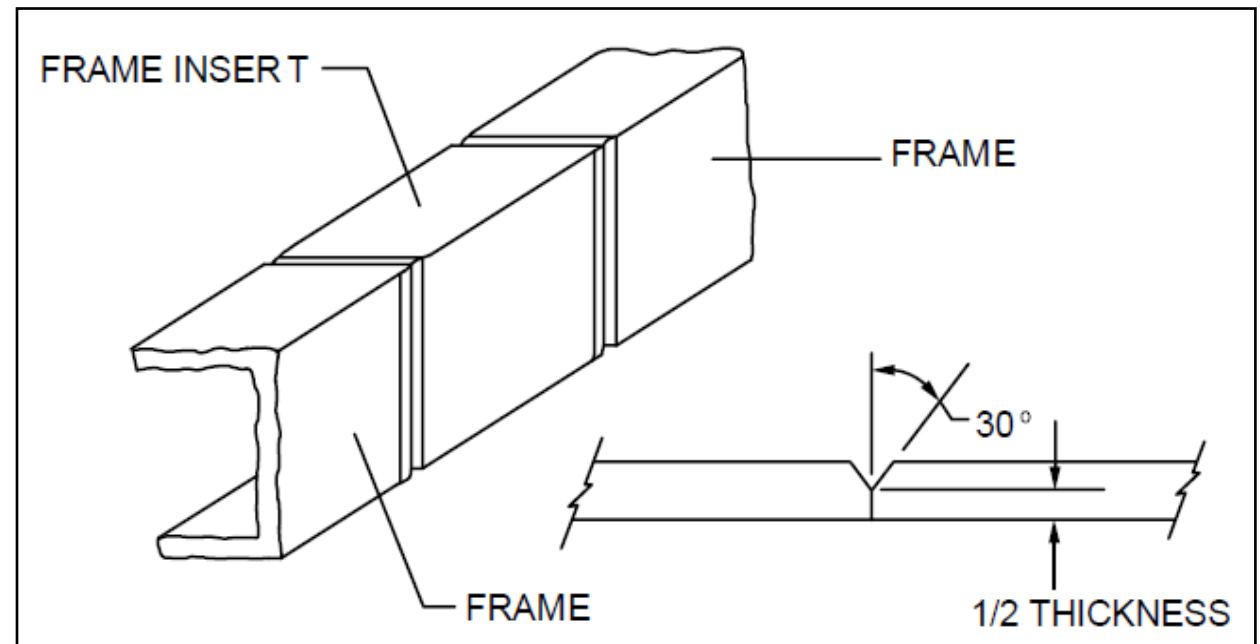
Chamfered Frame Rails Prior to Welding
